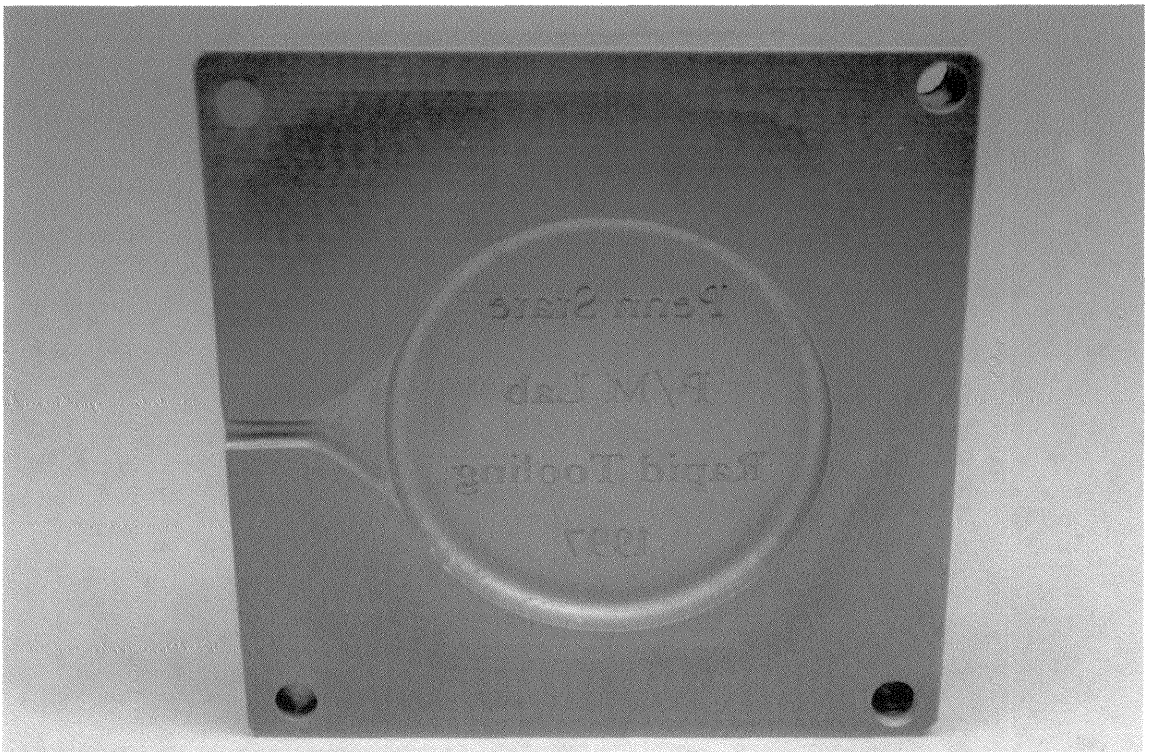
Picture of Final Tool Set Ready for Injection Molding.
